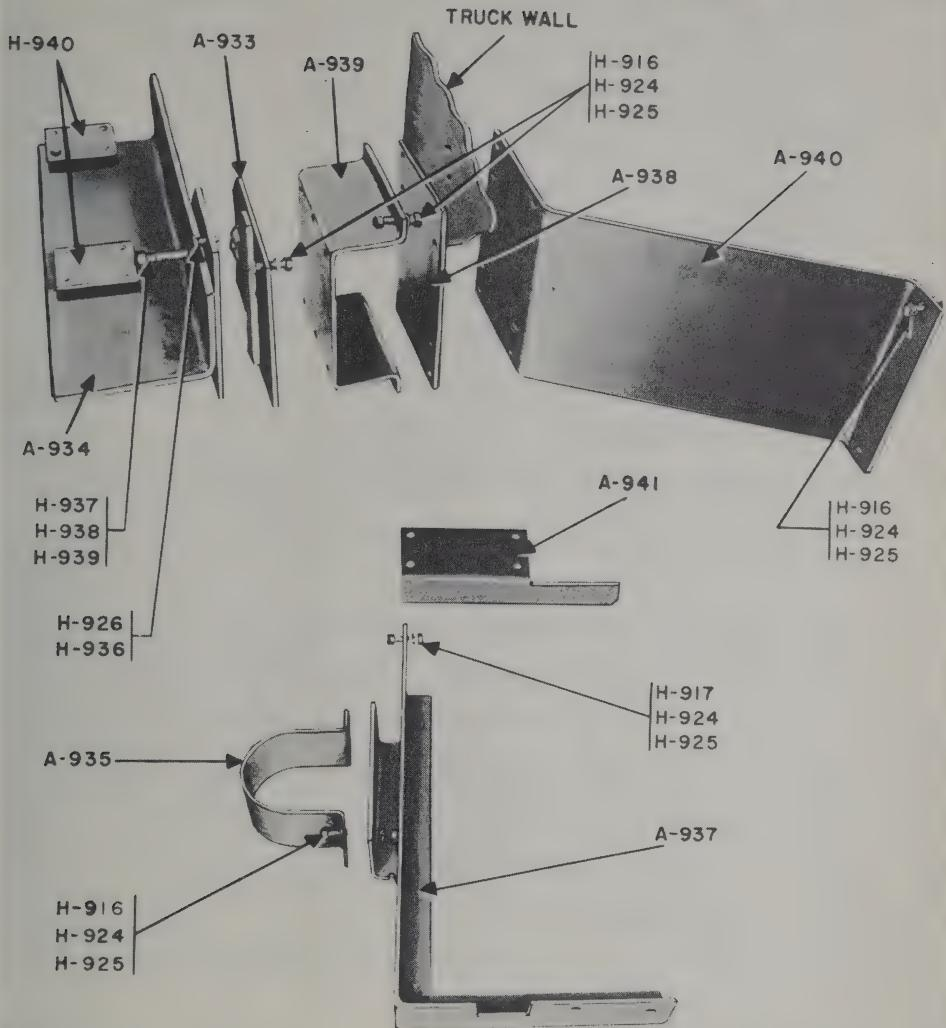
Telescopic Mast Mounting Parts for M-37 Truck
